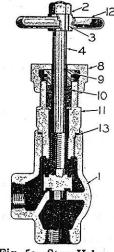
Stop Valve (Y-26, Screwed Bonnet)
